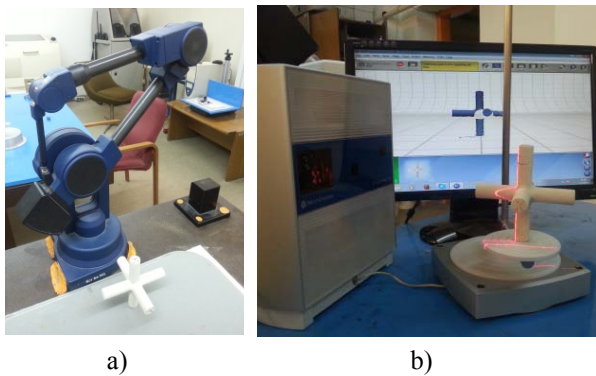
Measurement of dimensional deviation of produced 3DP test samples: a) 3D tactile scanner MicroScribe MX System, producer: Imersion, USA; b) 3D laser scanner Desktop 3D Scanner HD, producer: NextEngine, USA
